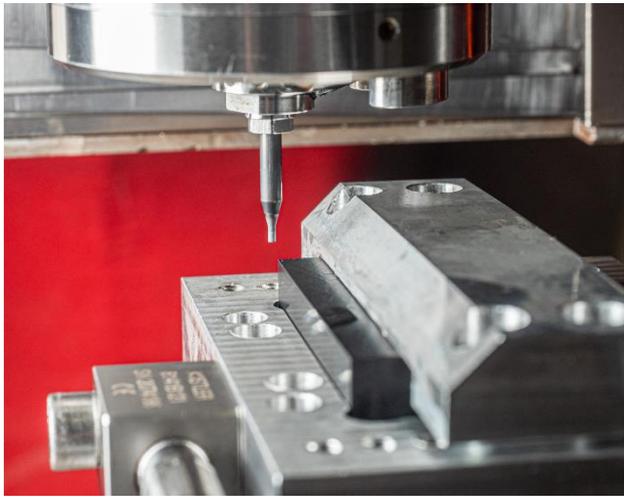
CVD-coated tools as well as an electroplated diamond tool were used for the machining tests.
